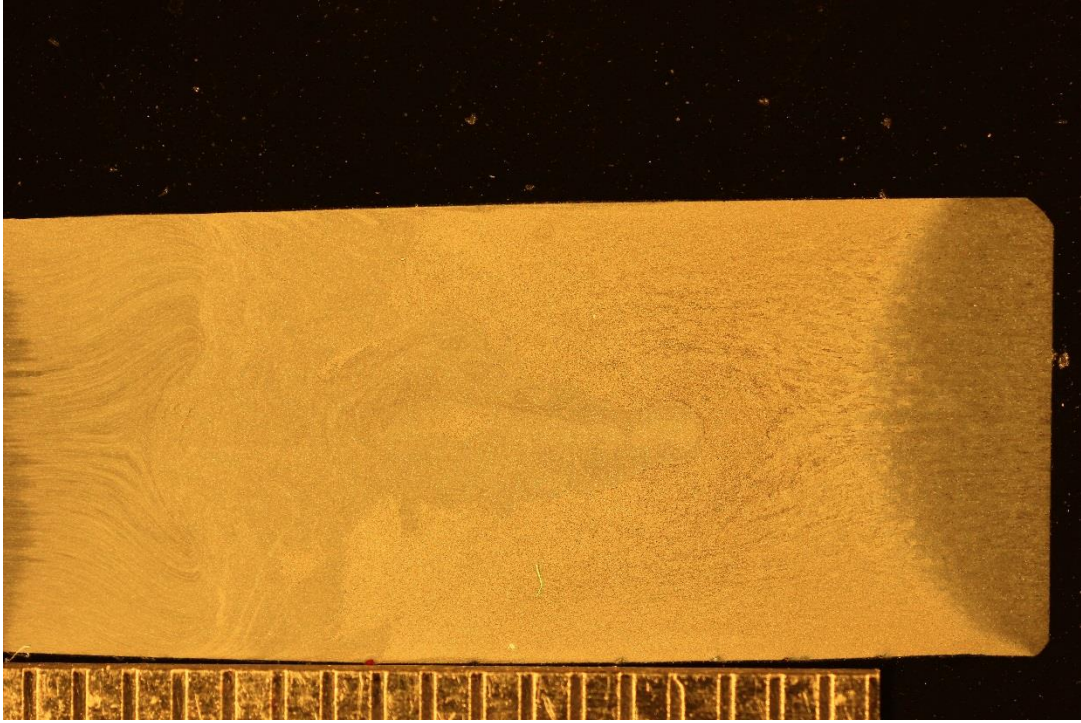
Macrograph of Weld 3 Sample 1
